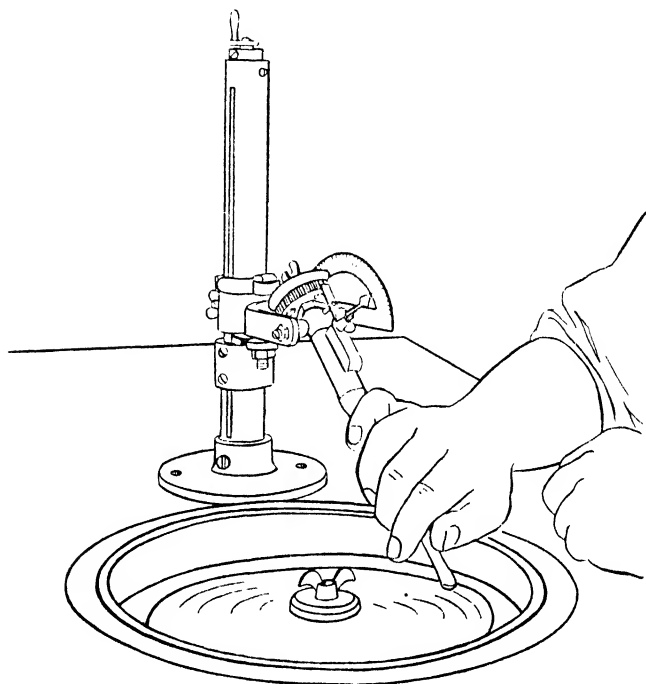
Modern equipment for cutting gem stones with facet-cutting attachment
